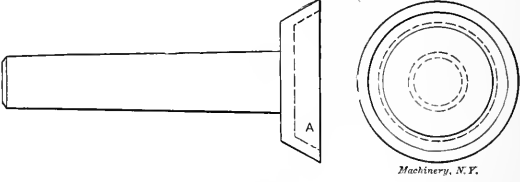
Head Center for Driving Piece shown in Fig. 5.
